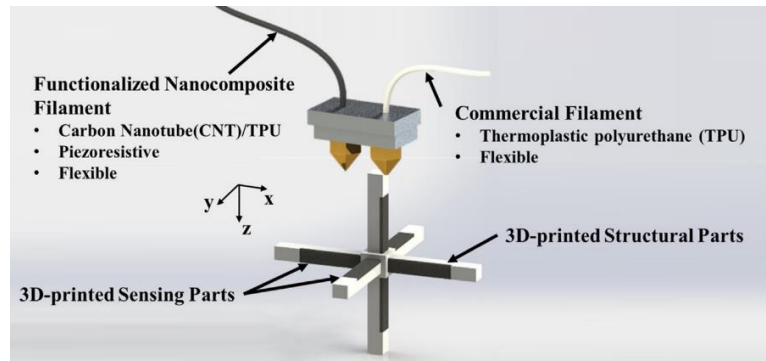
Schematic design of a 3D-printed multiaxial force sensor and its fabrication principle based on FDM type 3D printing [102].
